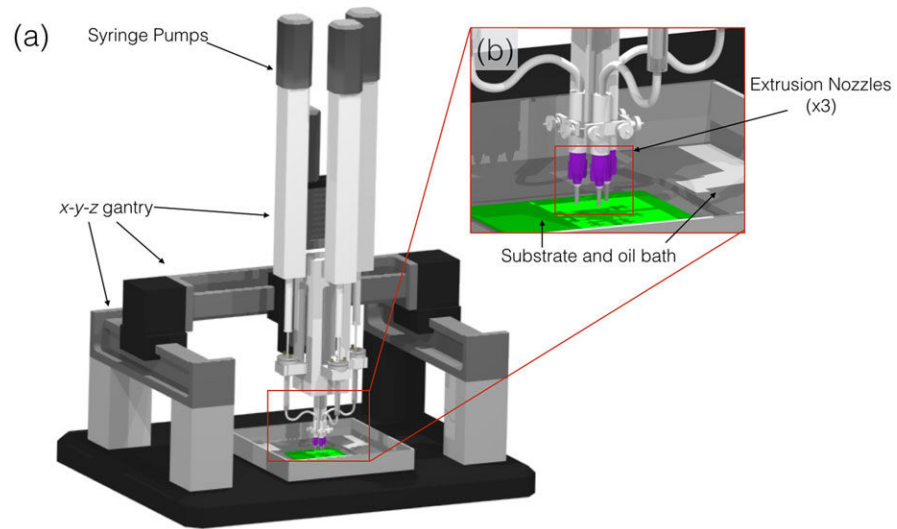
Schematic of robocasting machine (3D Inks LLC, Tulsa, OK) used to assemble scaffolds. (a) Overall set-up of machine and (b) magnified set-up of extrusion nozzles ($\times 3$) capable of co-depositing multiple materials
